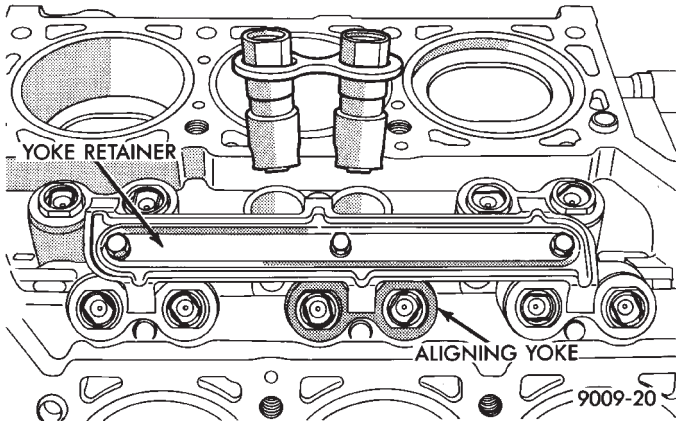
Roller Tappets Aligning Yoke and Retainer
